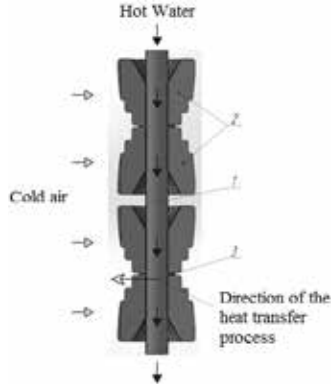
Cross-section of the tube with ribbing: 1 – tube, 2 – rib sections, 3 – fixing ring
